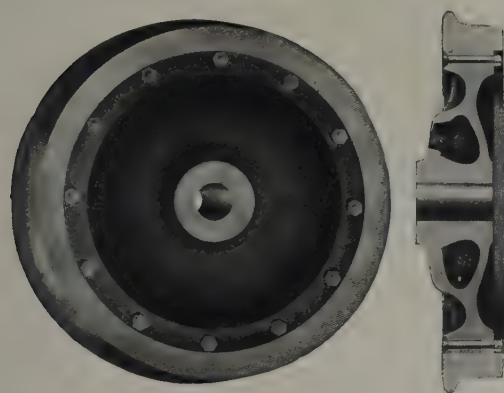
Cast Iron Plate Center with Tire Held by Shrinkage and Bolts.
